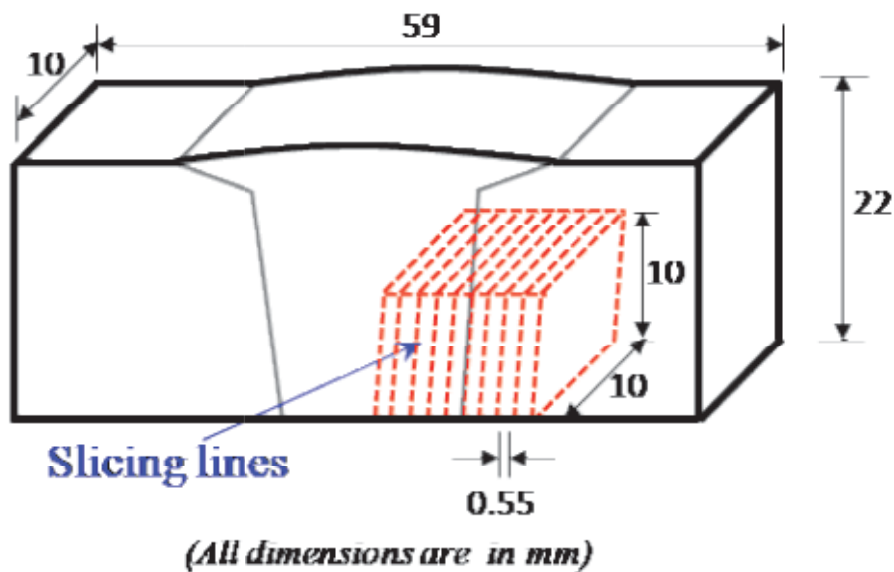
Fabrication of SPC specimens for weld joint studies.
